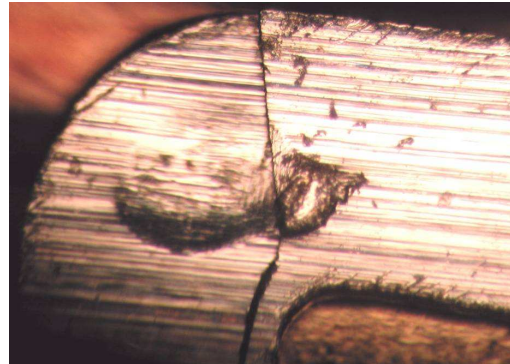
Au/Sn preform crack due to tack welding
